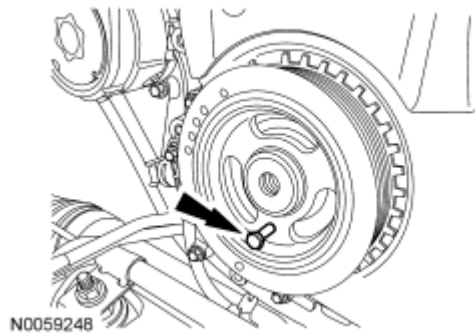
Locating Crankshaft Pulley & Hole
